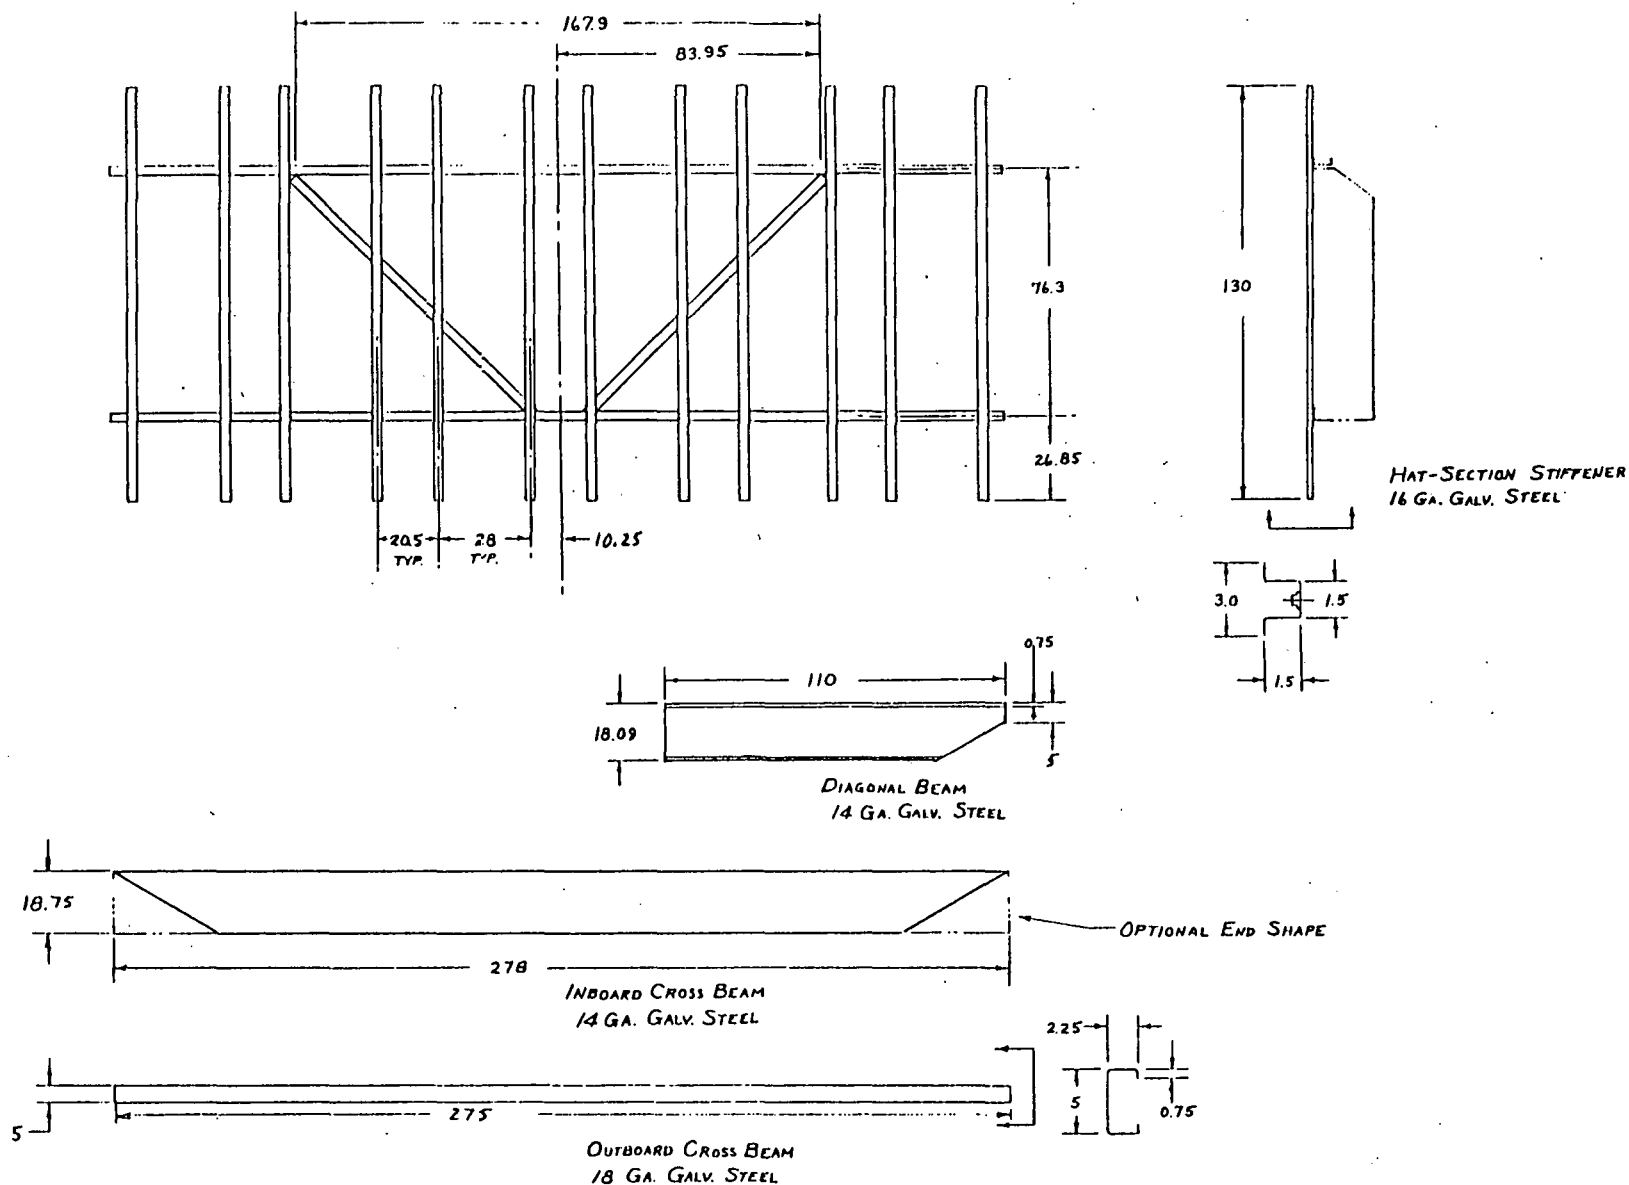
Reflector Support Structure Assembly
